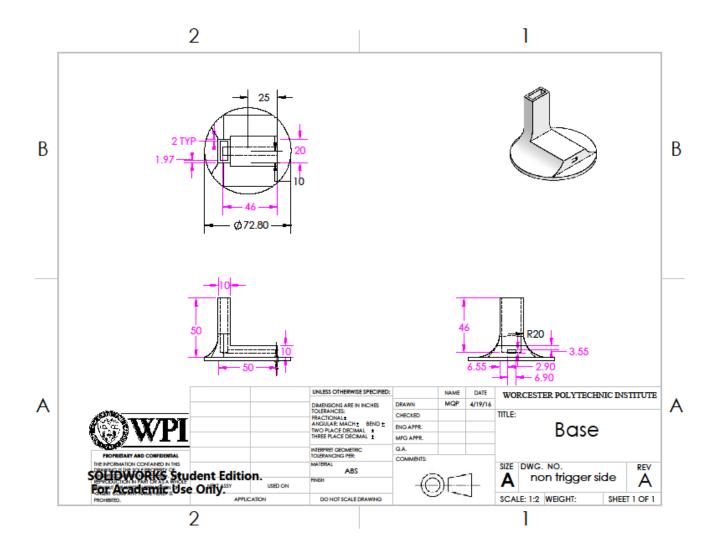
Solidworks Drawing of Non-Trigger Side Base of Final Design
